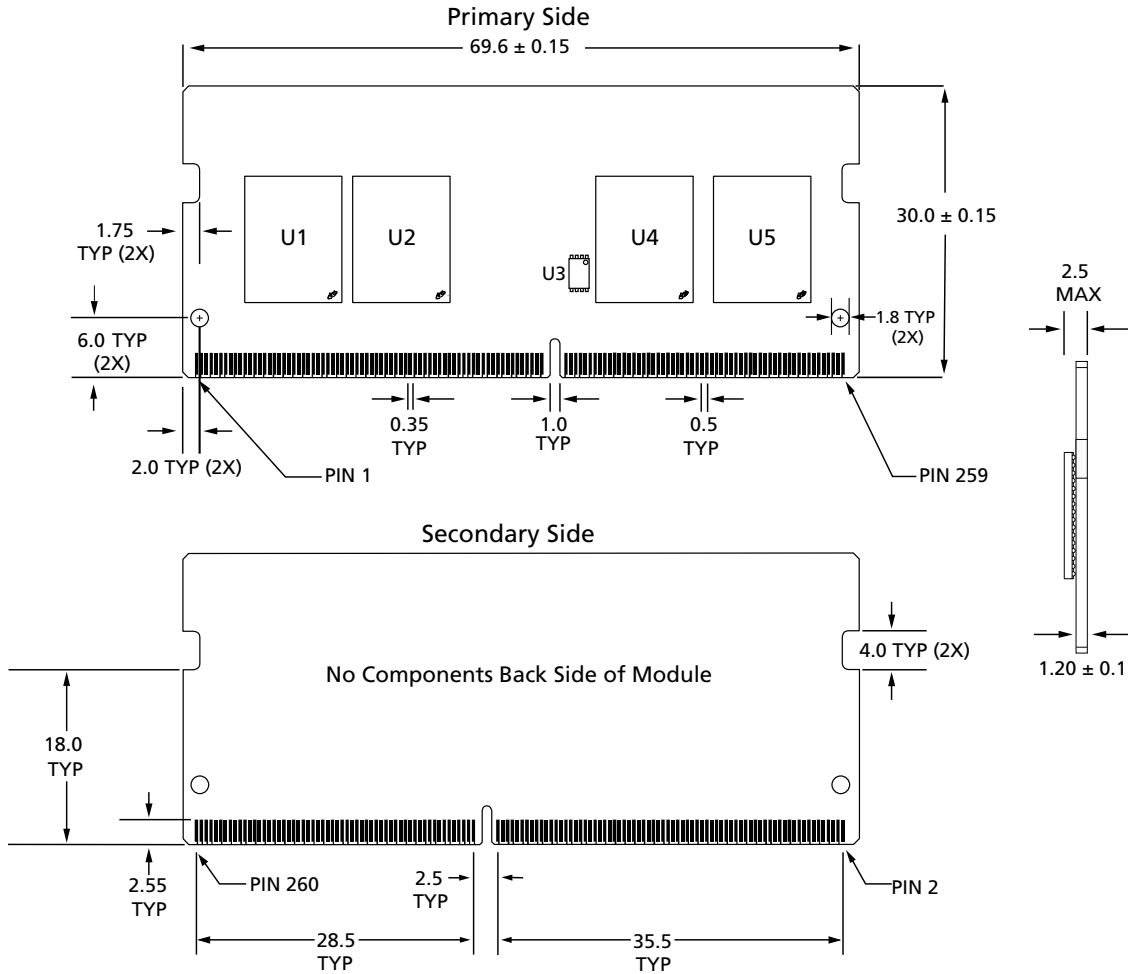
260-Pin DDR4 SODIMM - PCB 2874
